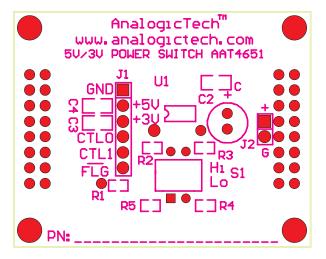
Evaluation Board Top Side Silk Screen Layout / Assembly Drawing.
